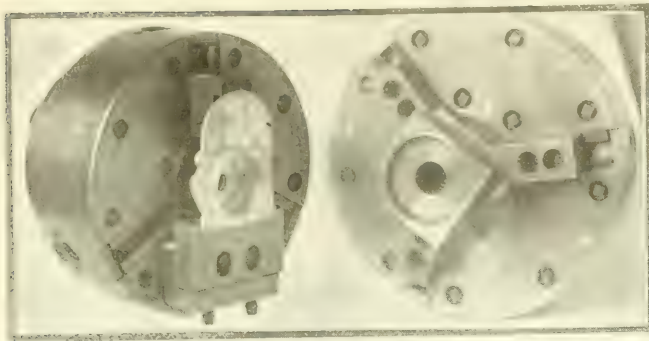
LEFT HAND VIEW. ONE JAW METHOD OF HOLDING MAGNETO END PLATE.
